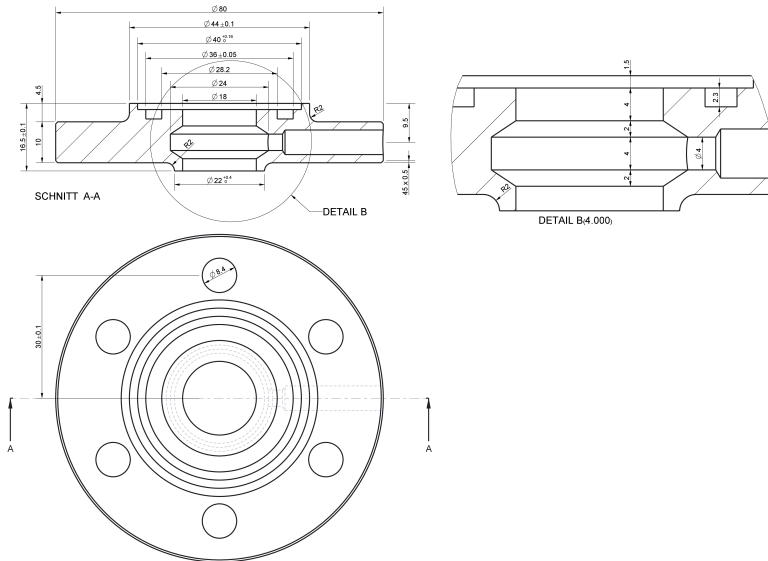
Longitudinal section as well as cross section of the test tube. Measuring tube is made of brass CuZn39Pb3. Overall tolerance: ISO 2768-f.
